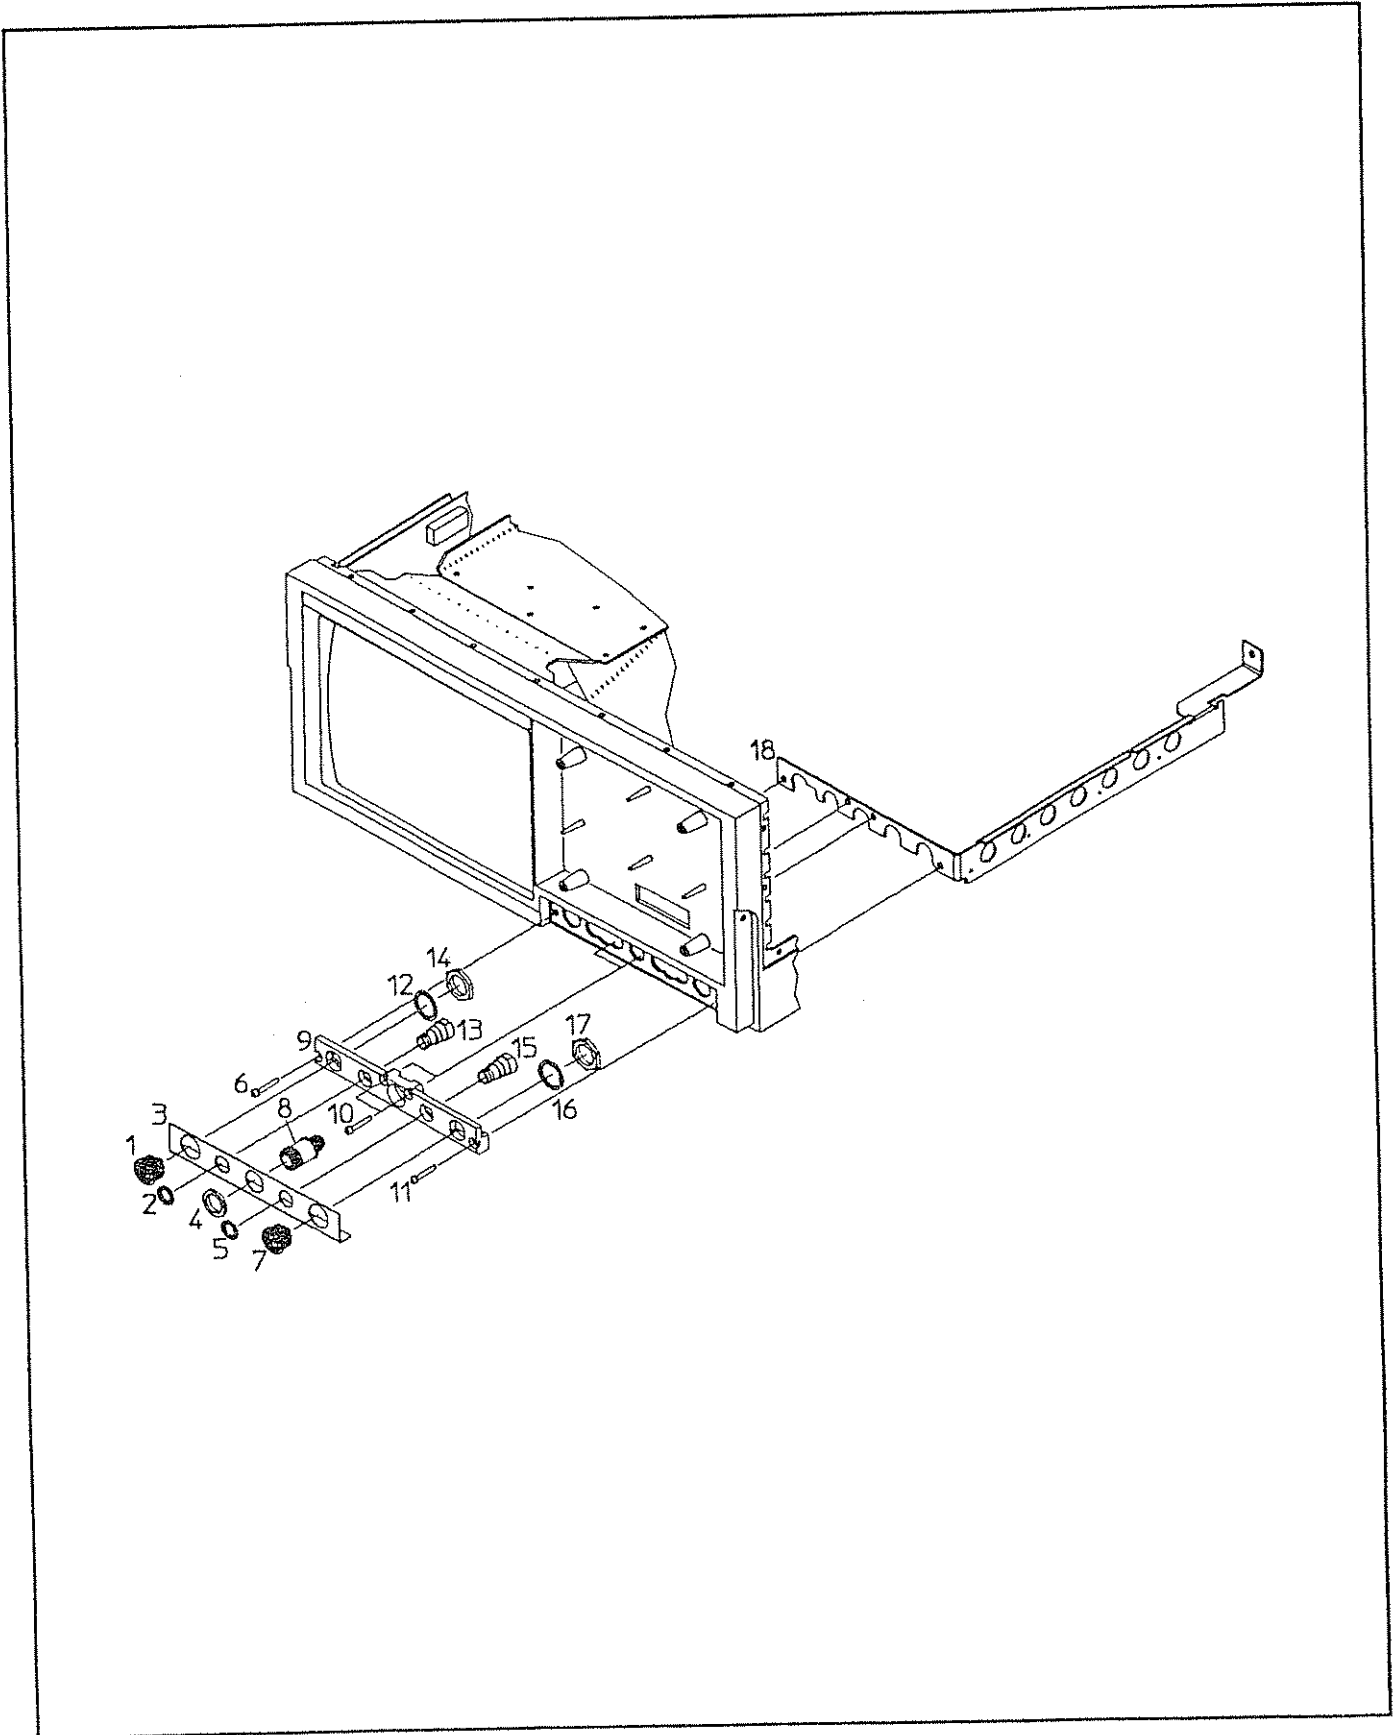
Front Panel Connectors Illustrated Parts Breakdown
